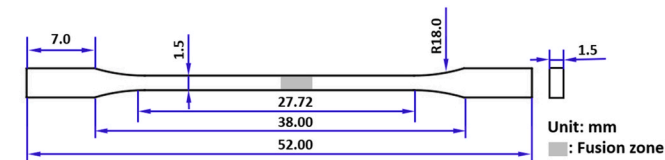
Geometry and dimensions of specimens used for uniaxial tensile testing.
